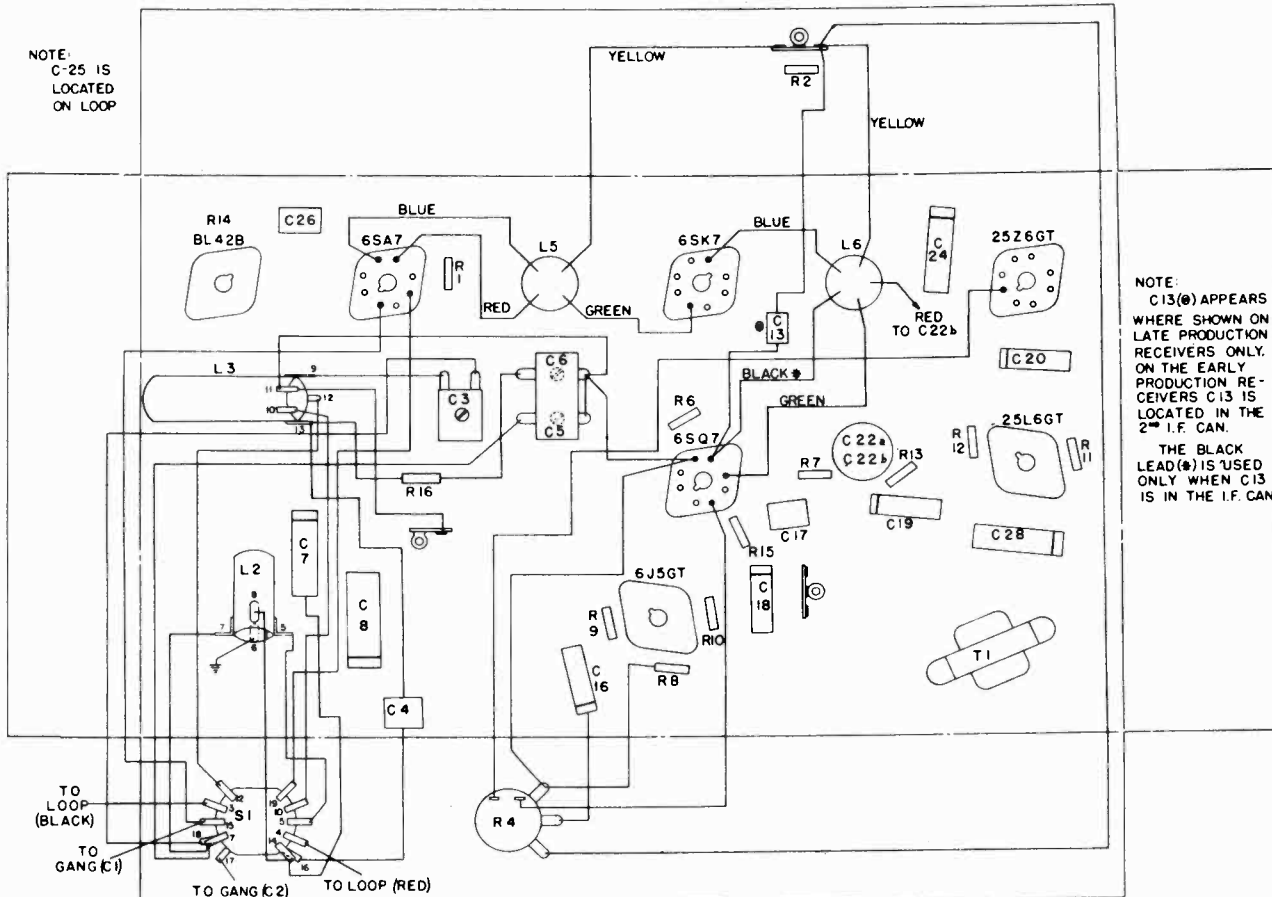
Chassis Parts Layout for Models H-620U, 630U and 632U
